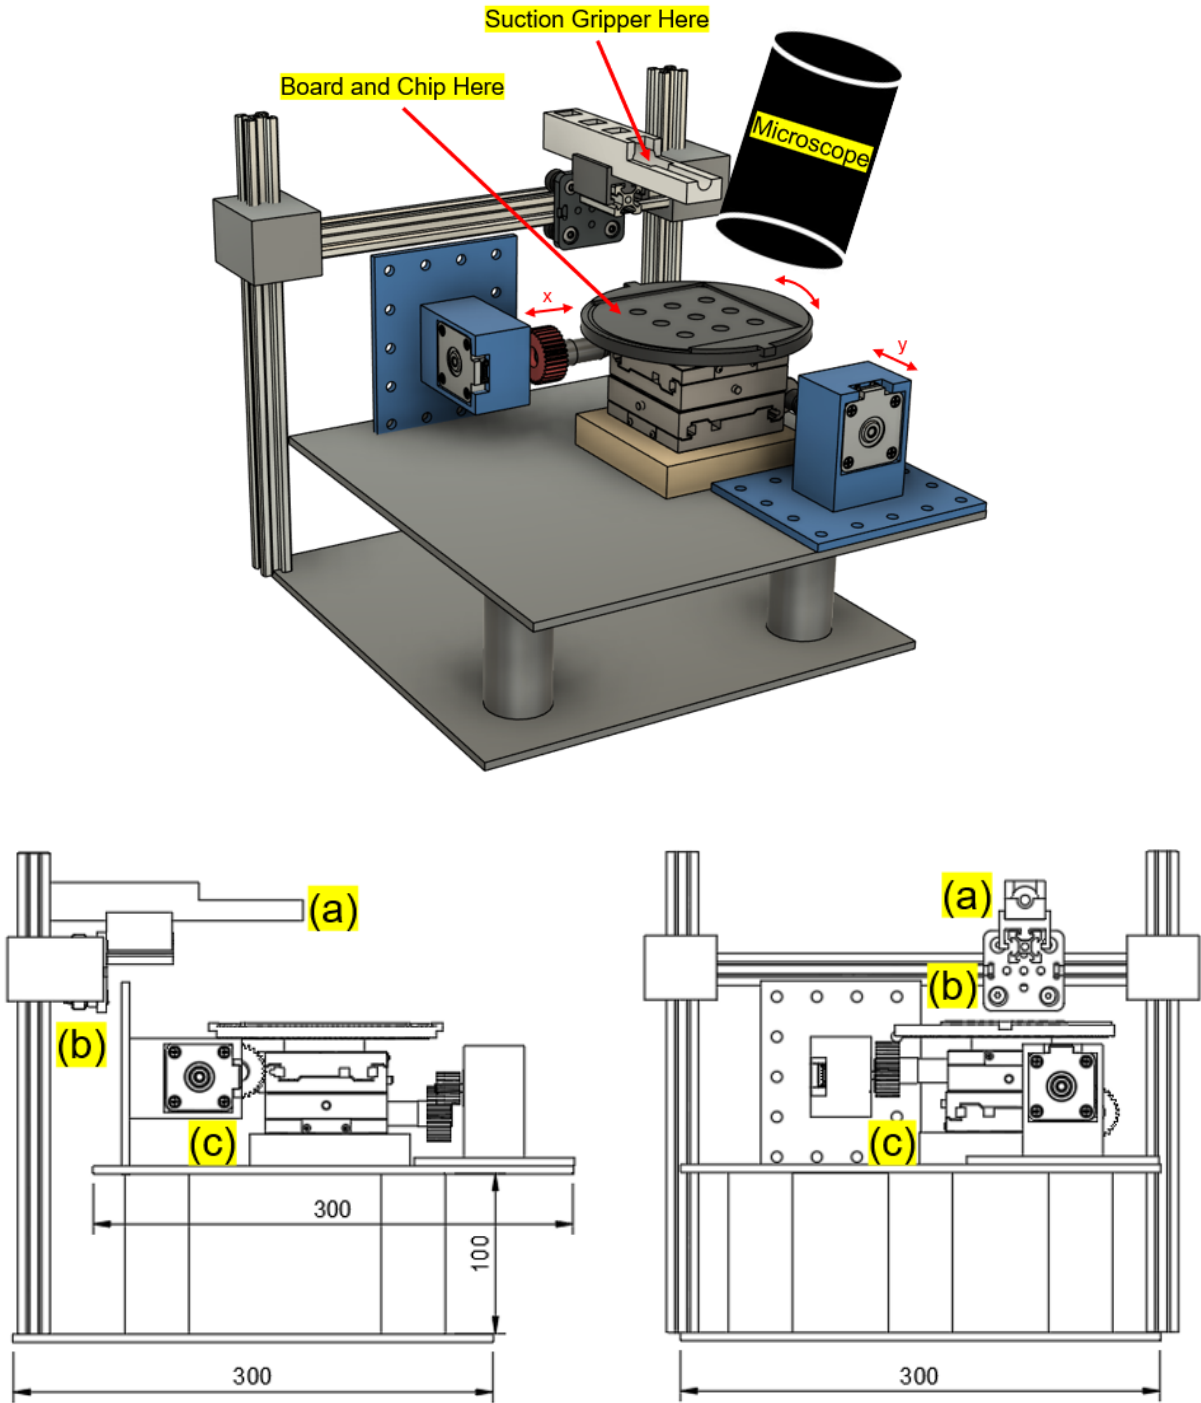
CAD model (top) and technical drawing (bottom) of microwave chip assembly system. The assembly model includes a pneumatic suction gripper mount (a), a gantry system (b), and dual motorized translation stages to control stage movement in x and y directions (c). All dimensions are given in millimeters.
